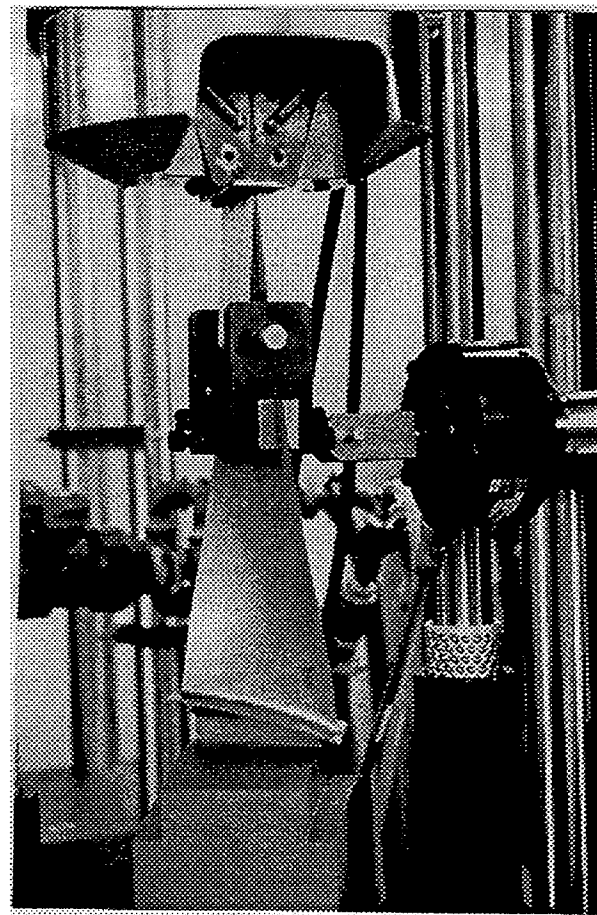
Complete Assembly of Blade Specimen and Gripping System
